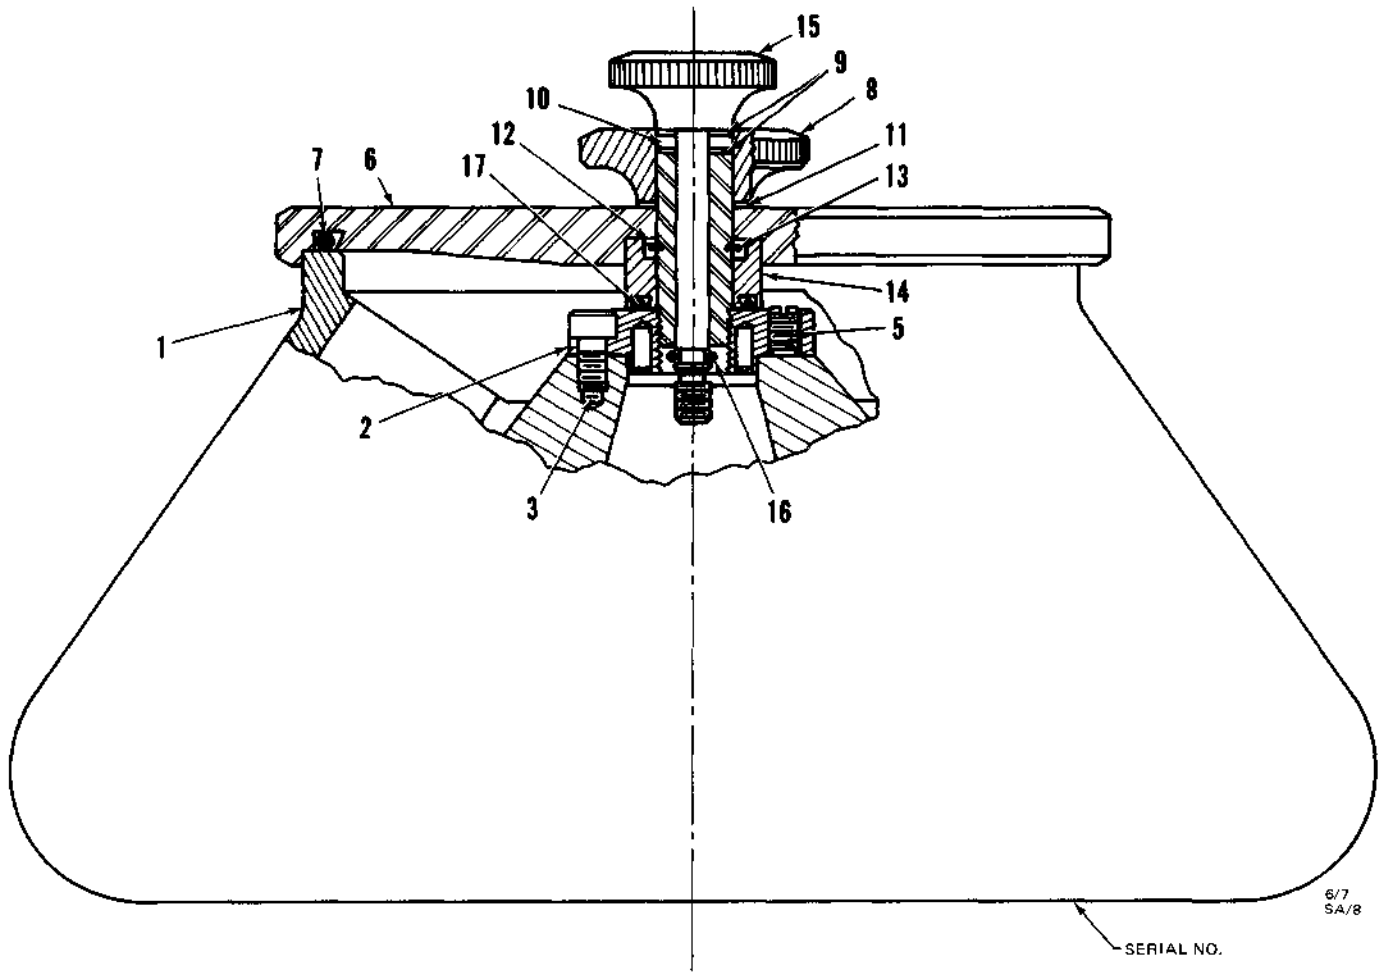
Parts of the SA-600, SE-12, SM-24 and SS-34 Superspeed Angle Rotors
